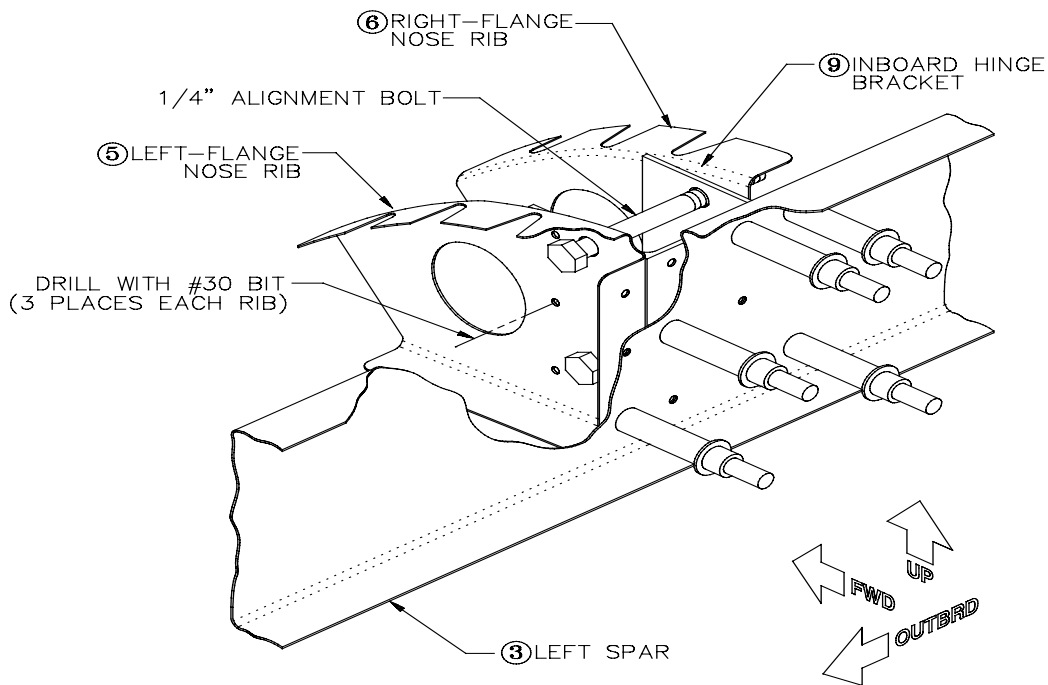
Drilling the Hinge Bracket/Rib Web Rivet Holes
